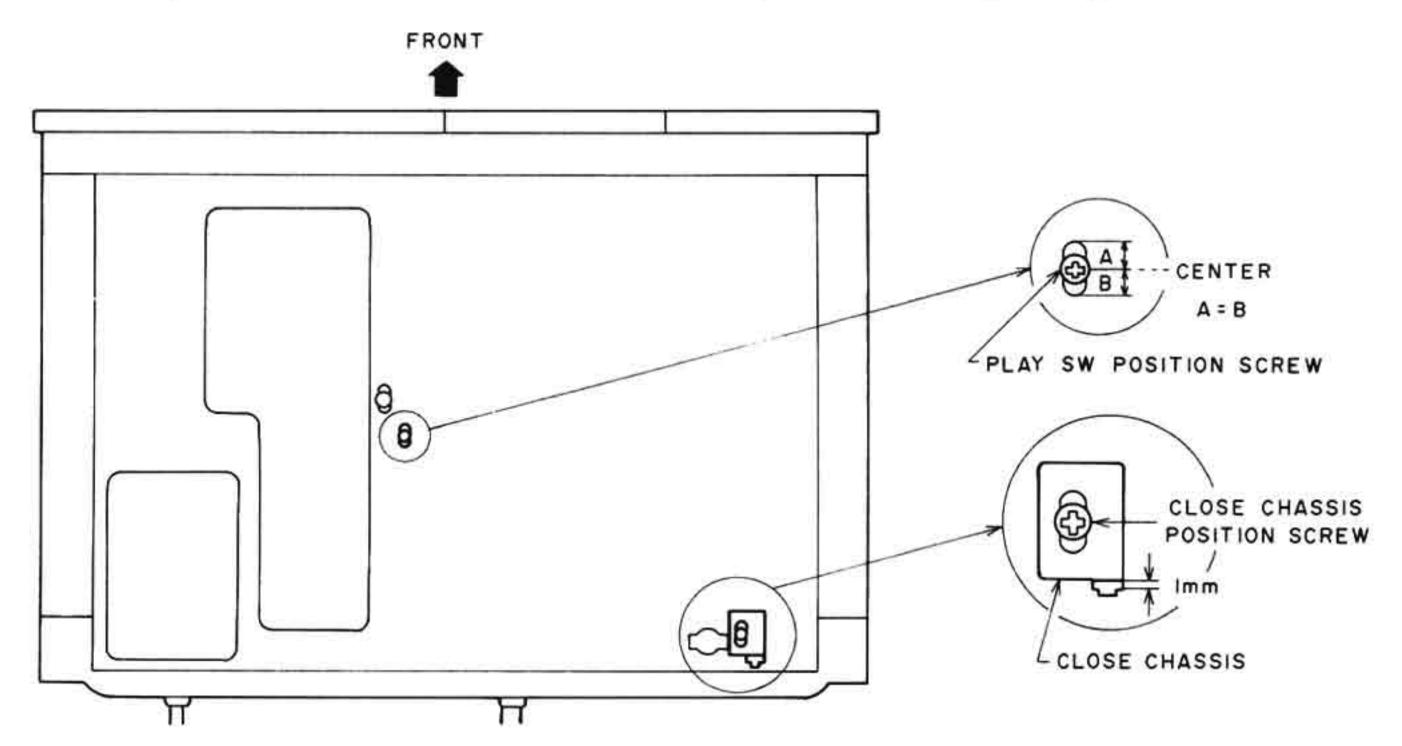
Play SW/Close Chassis Position ADJ (Bottom View)
